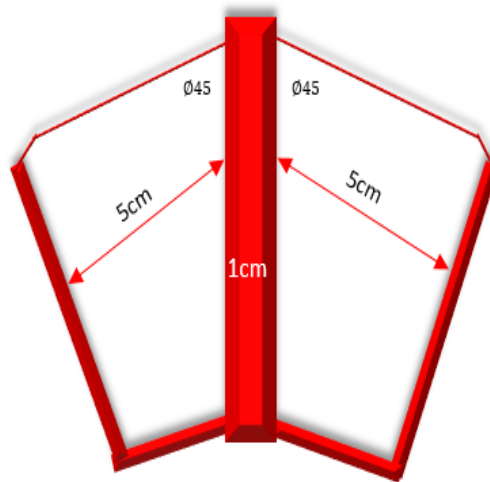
shows the top view of the locally manufactured triangular blades (T3).
